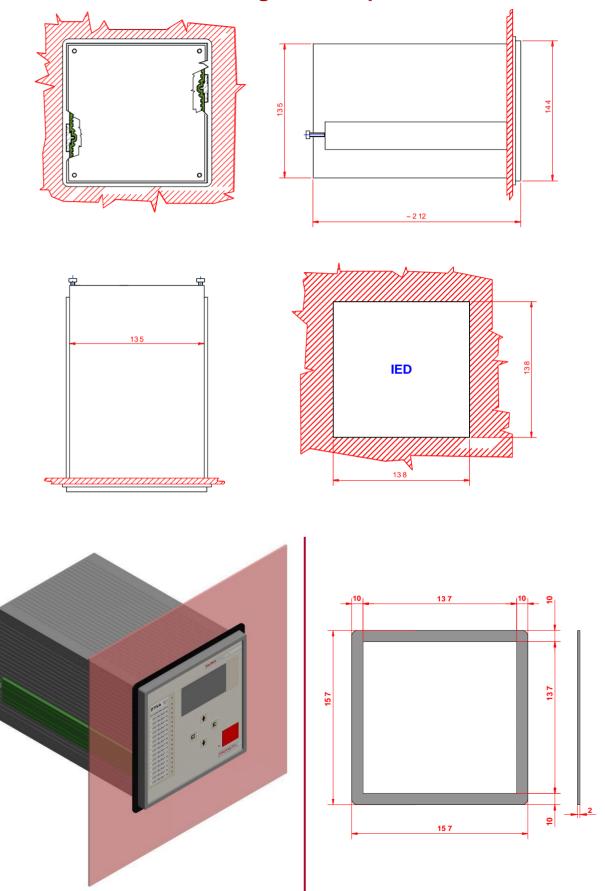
Dimensions for flush mounting of 24 HP panel instrument case with 3D illustration
